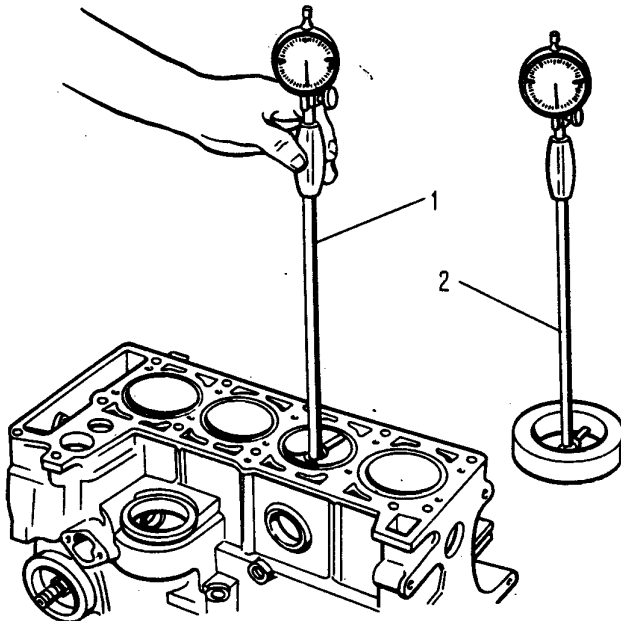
Measuring Cylinders with Internal Gauge: 1 - internal gauge; 2 - zeroing internal gauge by check gauge
